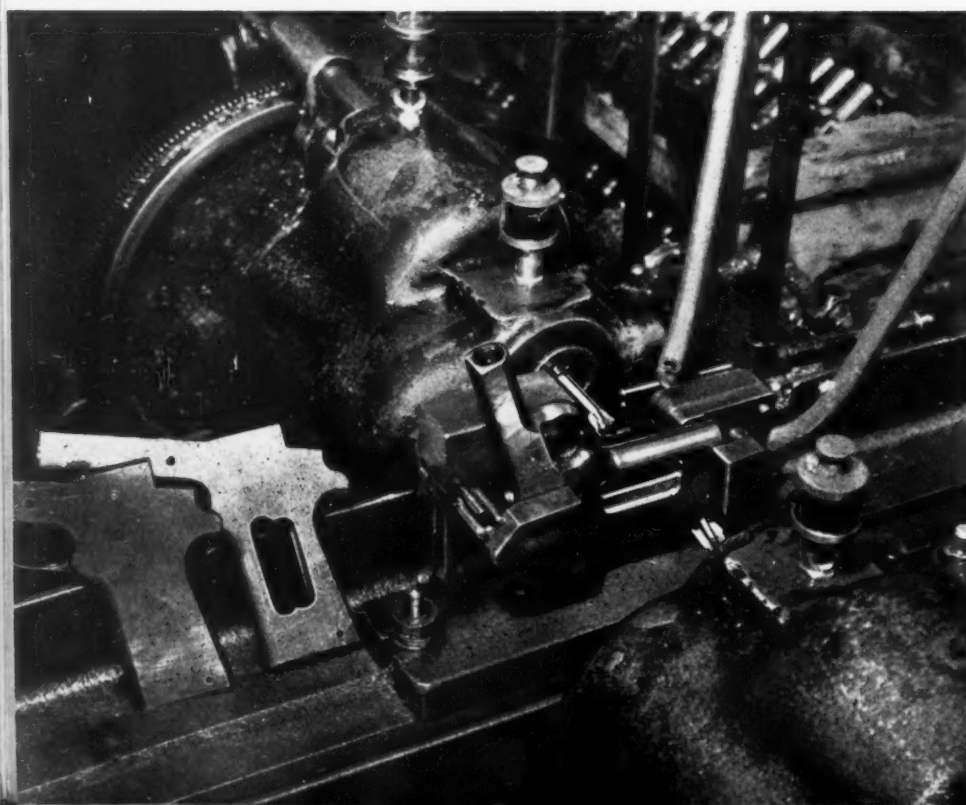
To Lighten the Receiver, a Rectangular Opening is Cut through the Handle. Two Slots are Spline-milled to Form the Rough Opening. The Two Small Holes in the Blank have been Previously Drilled for Locating the Piece in Subsequent Operations
